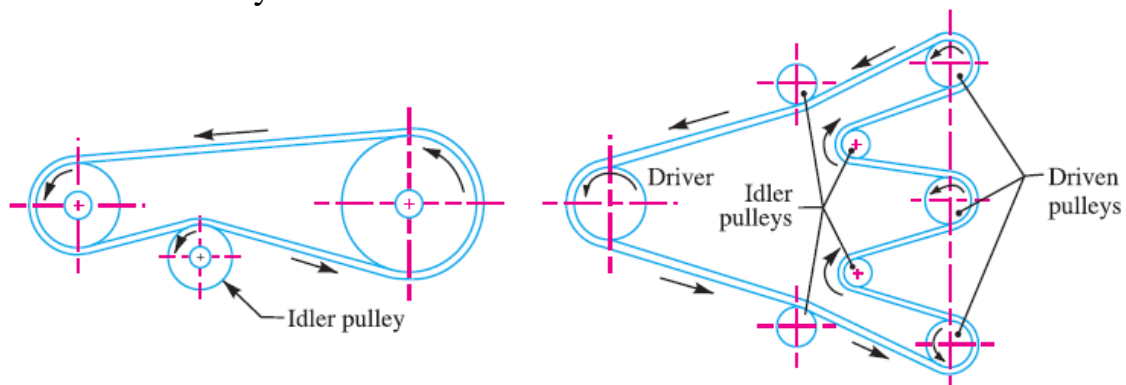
5). Belt drive with single idler pulley . Fig. (7 – 6). Belt drive with many idler pulleys.
